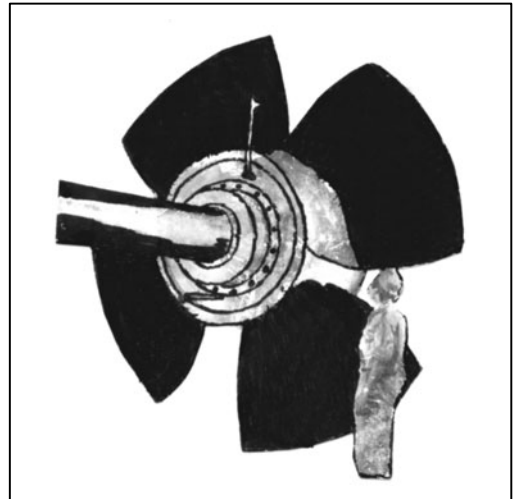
A giant-sized propeller mounted on drive shaft
